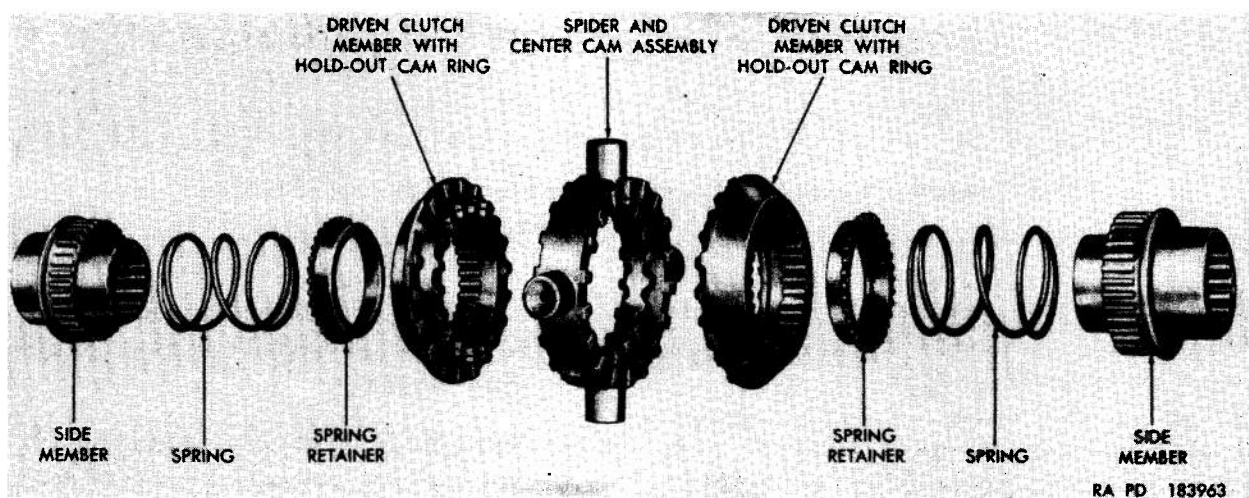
Silent Type No-Spin Differential—Disassembled View
